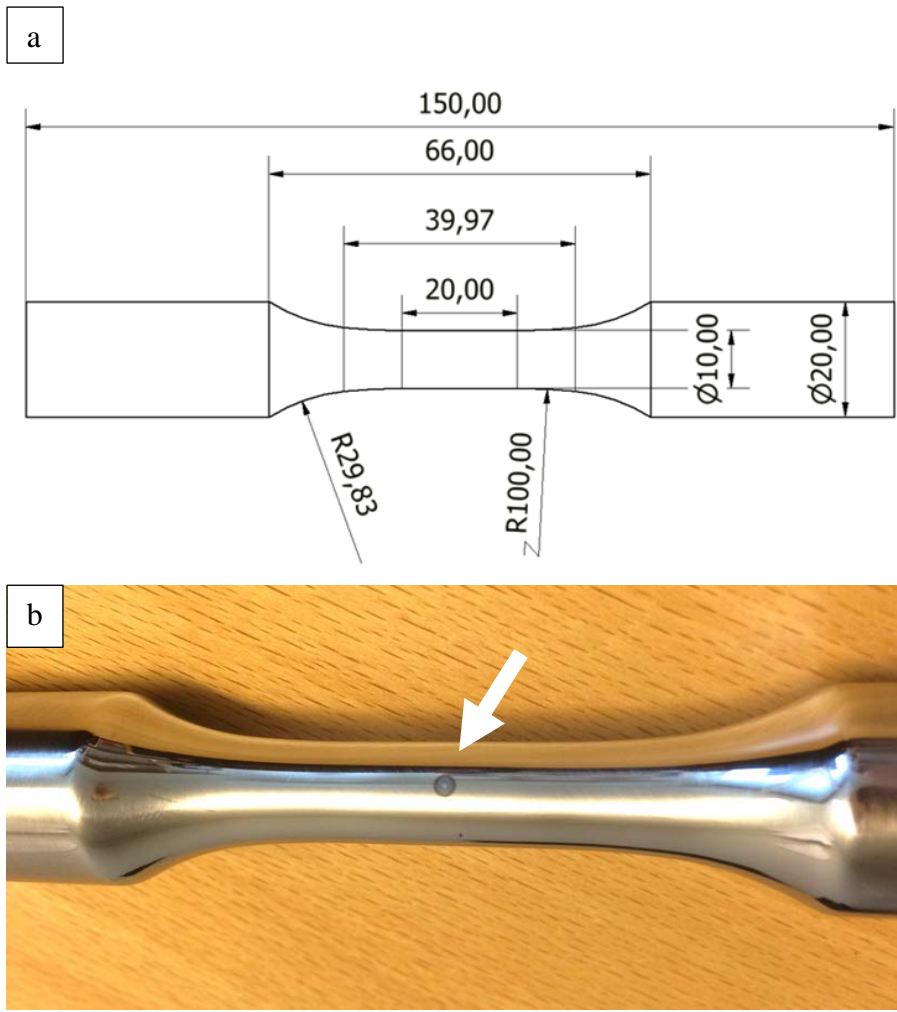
a) Specimen geometry, b) arrow points to WEL on test bar.
